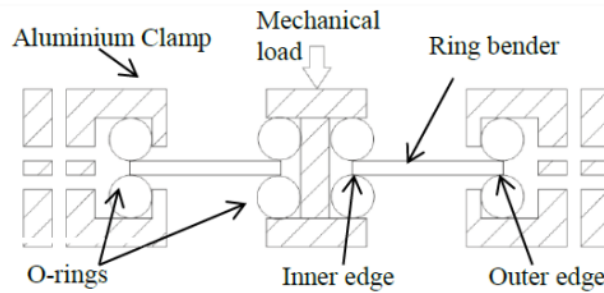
Ring bender mounting arrangement using O-rings [28]
